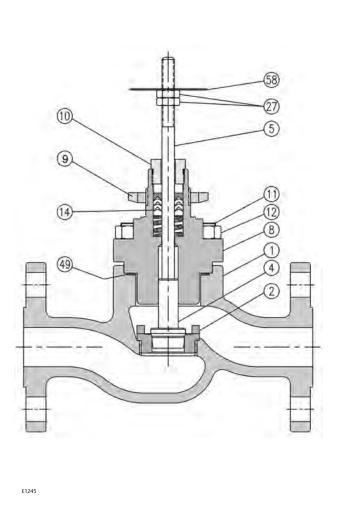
Baumann 24000SVF Valve Body Assembly with Standard PTFE Spring-Loaded Packing
